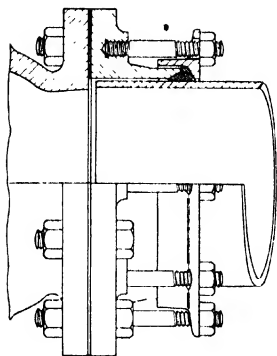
FLANGE ADAPTER FOR JOHNSON COUPLINGS
